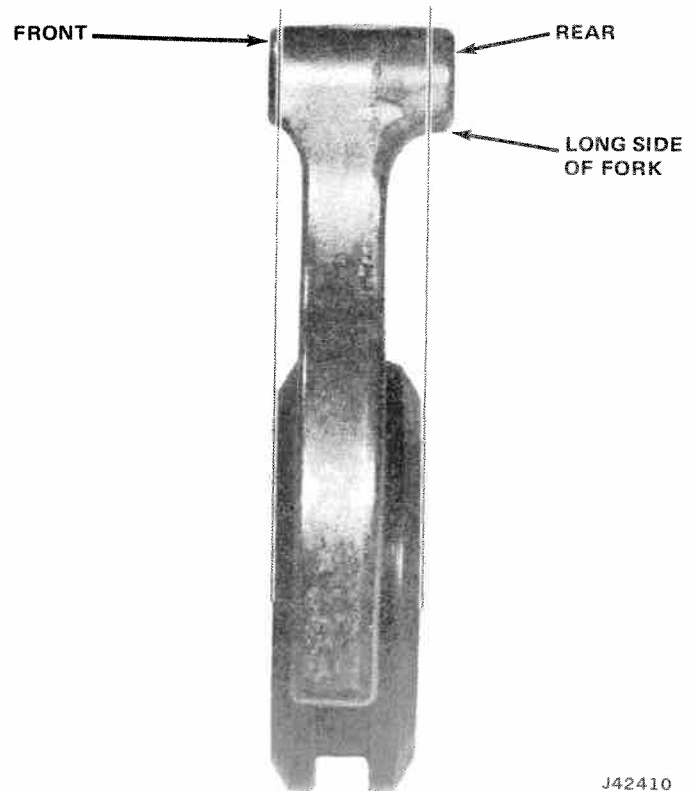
Lockup Hub Assembly with Shift Fork
